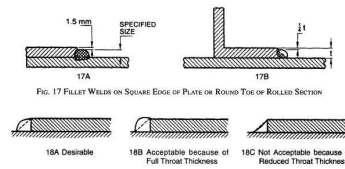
FILLET WELDS ON SQUARE EDGE OF PLATE OR ROUND TAIL OF ROLLED SECTION
